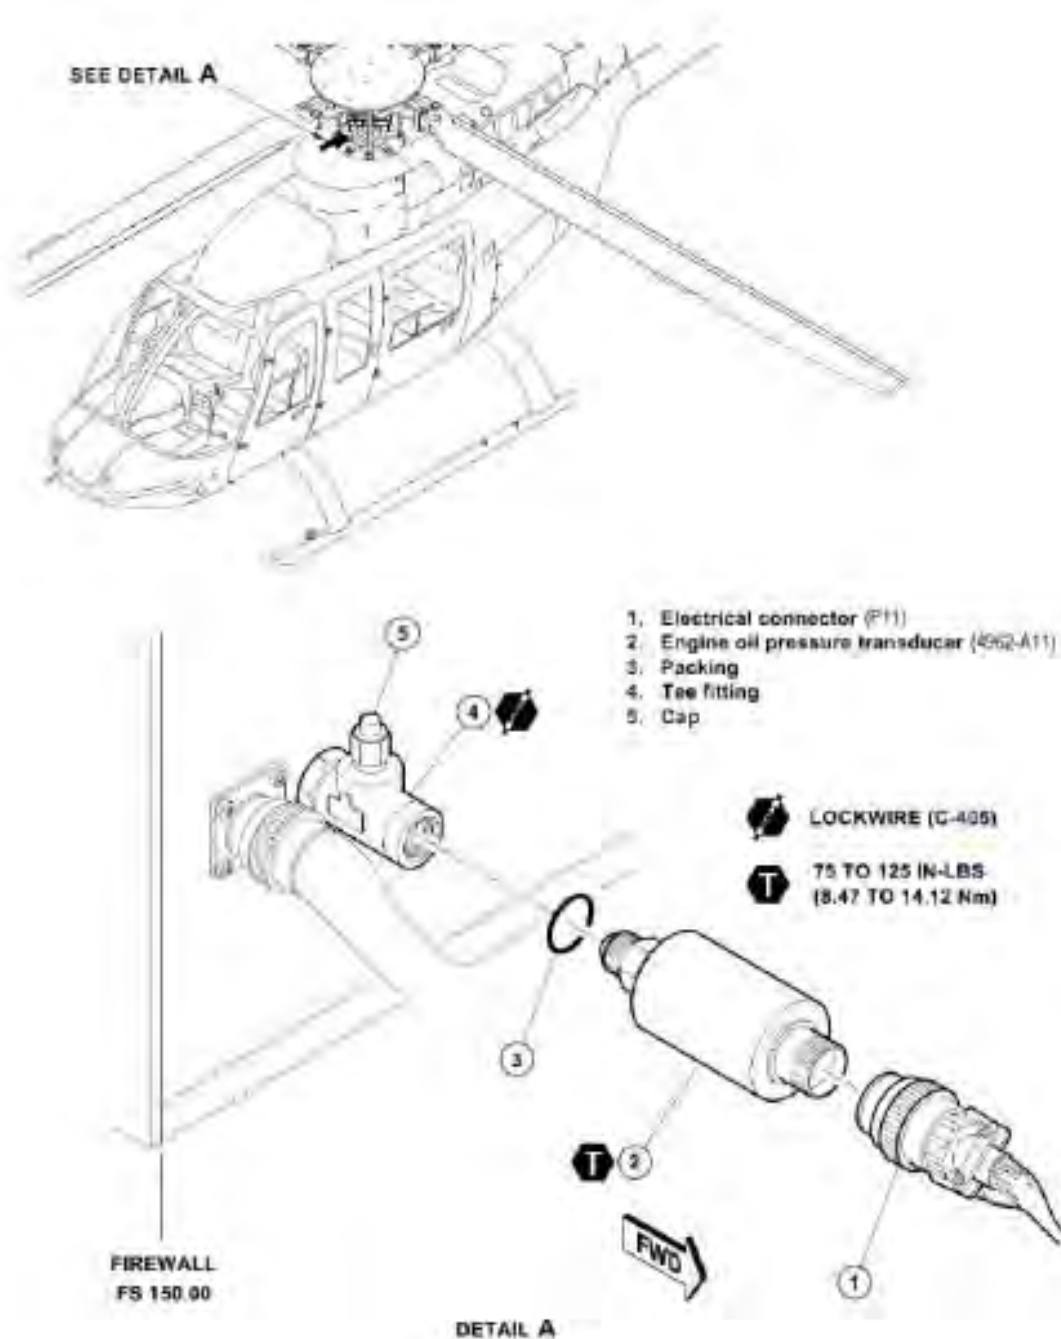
Engine Oil Pressure Transducer - Removal and Installation
